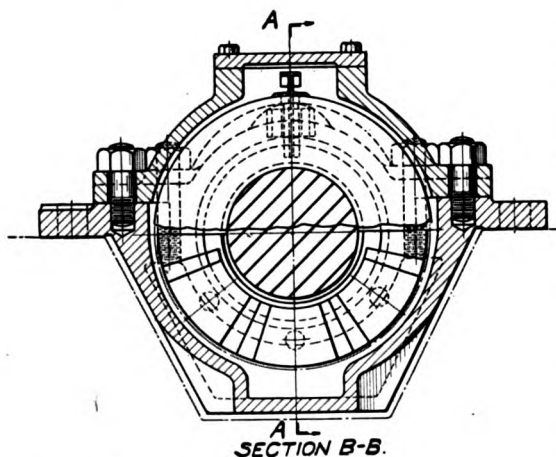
Self-aligning thrust-bearing with leveling washers used with gear-reduction drive
